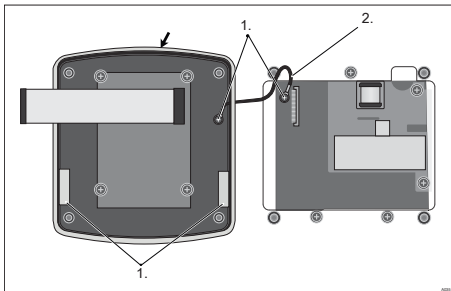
With control panel installation: Fit the profile seal onto the top part of the controller housing
